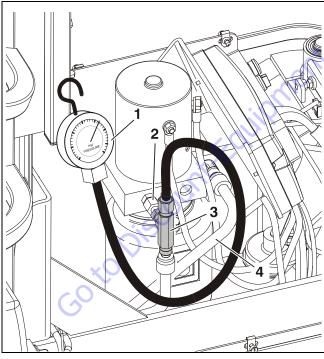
Typical Hydraulic Pressure Gauge Installation
